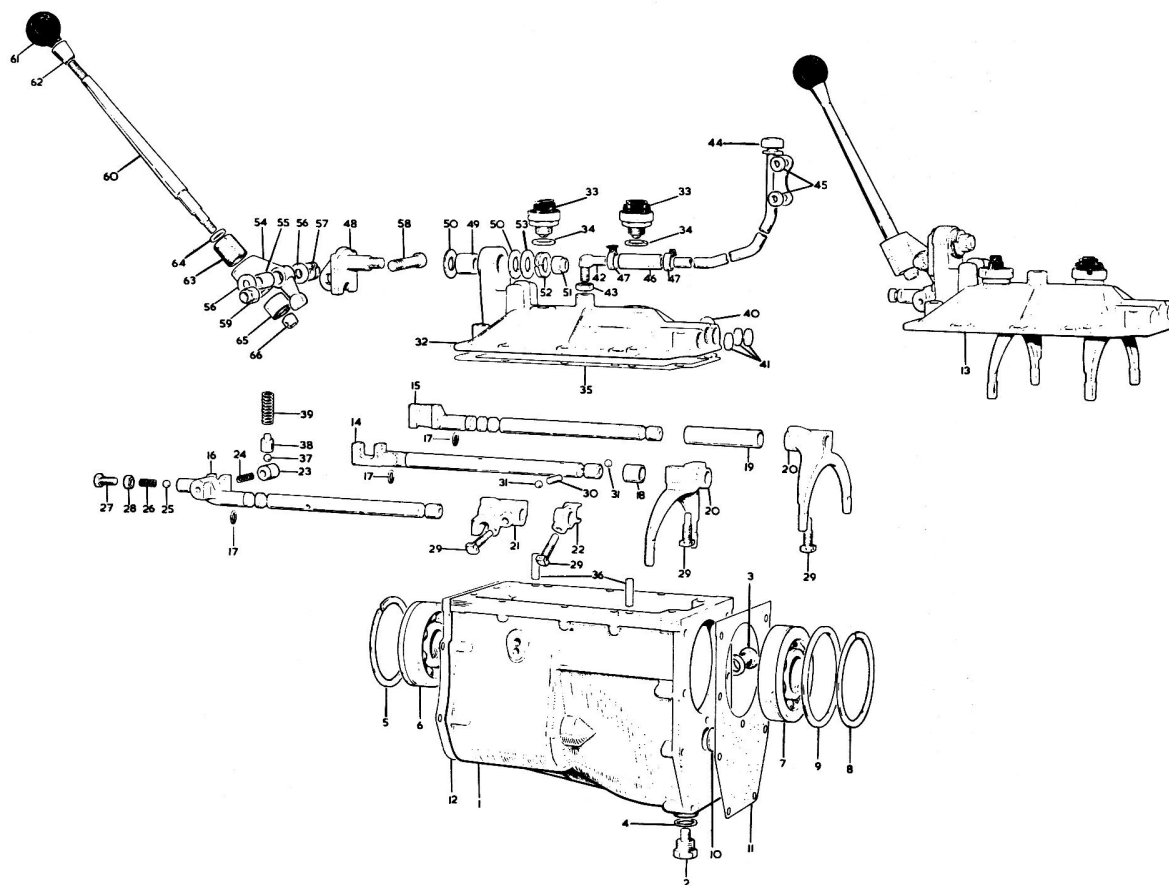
COMPONENTS OF LATER MK 2, 240 AND 340 GEARBOX CASING
